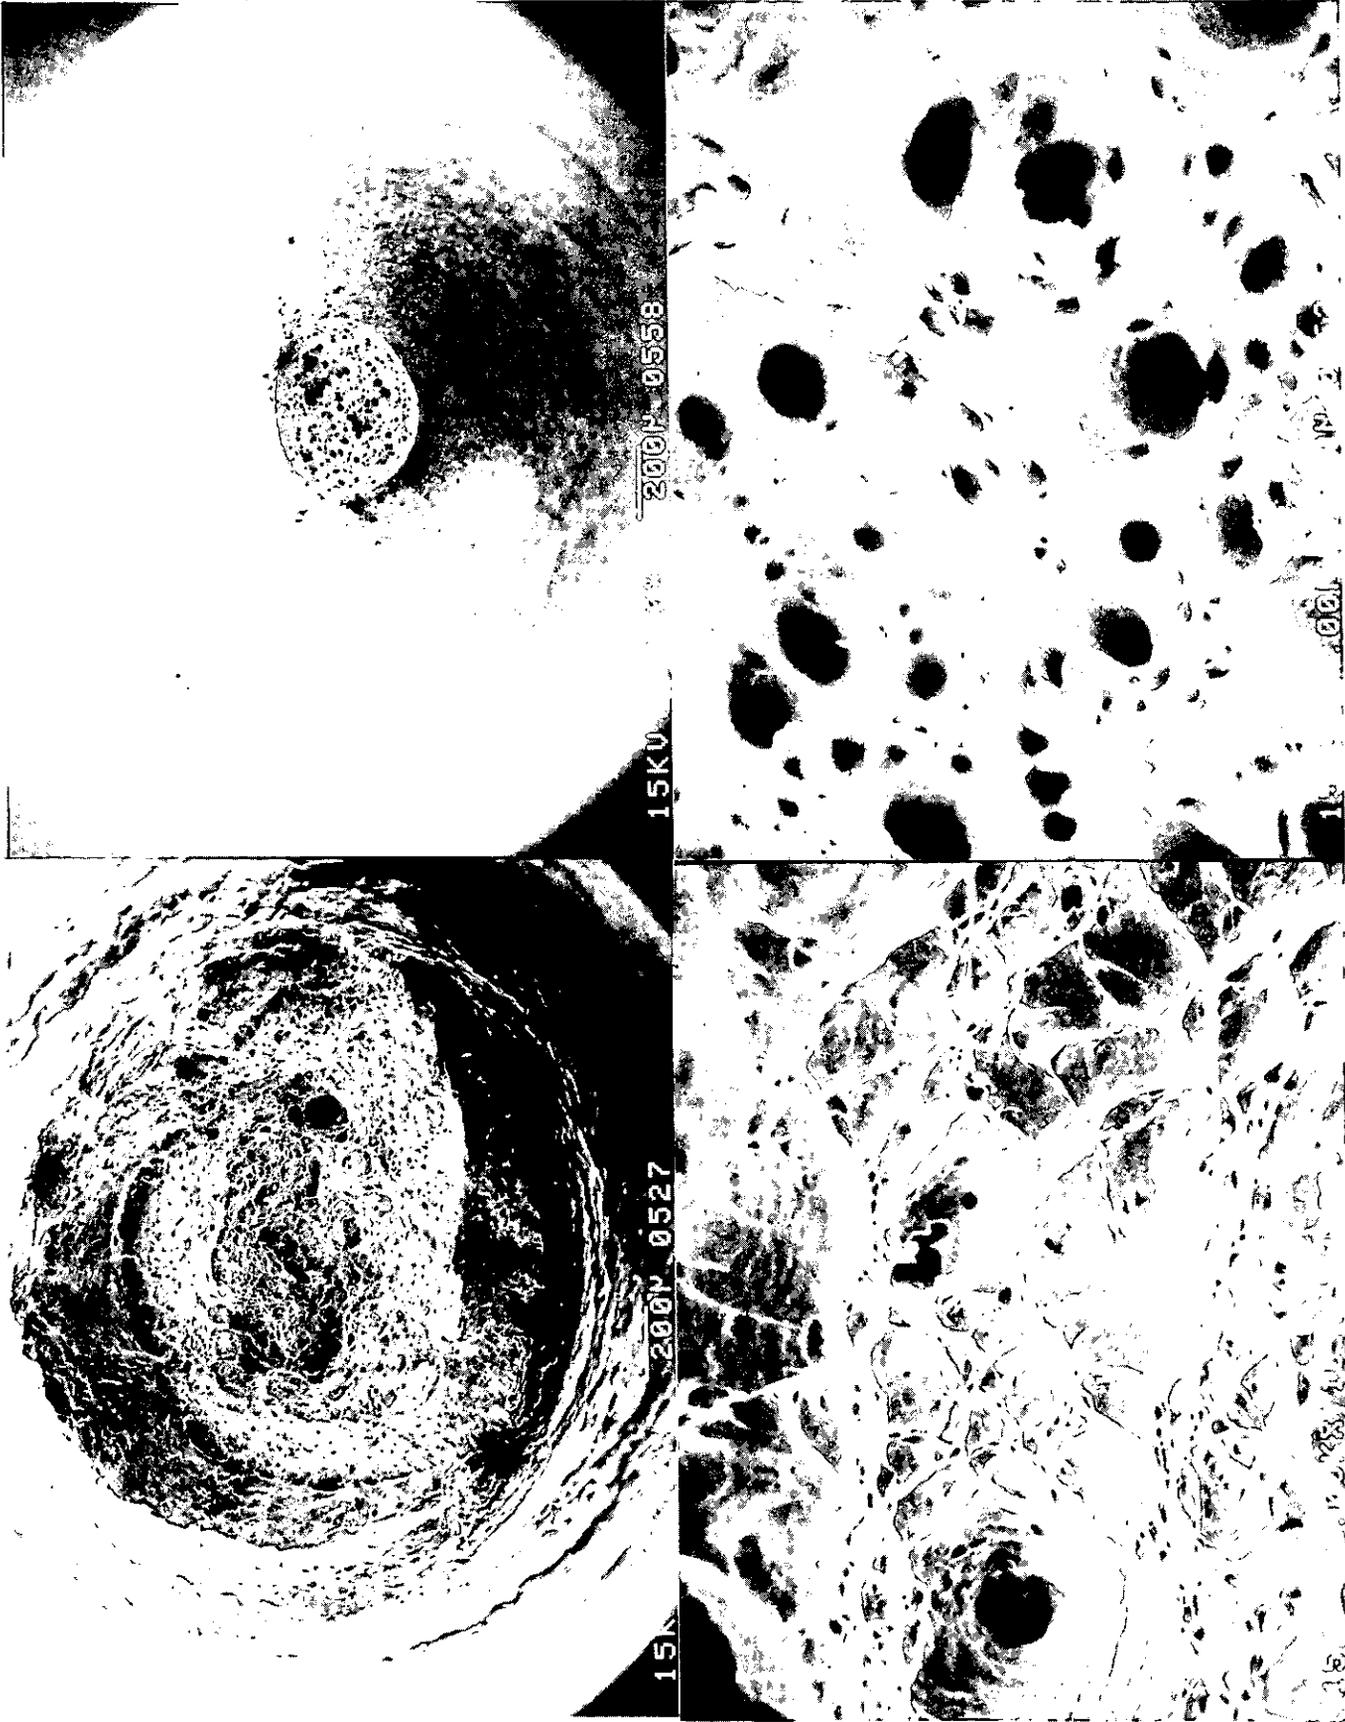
(Continued). Fracture Surfaces of Specimens of Hydrogen-Charged HERF 316L Stainless Steel from Rapid Heating Tensile Tests
